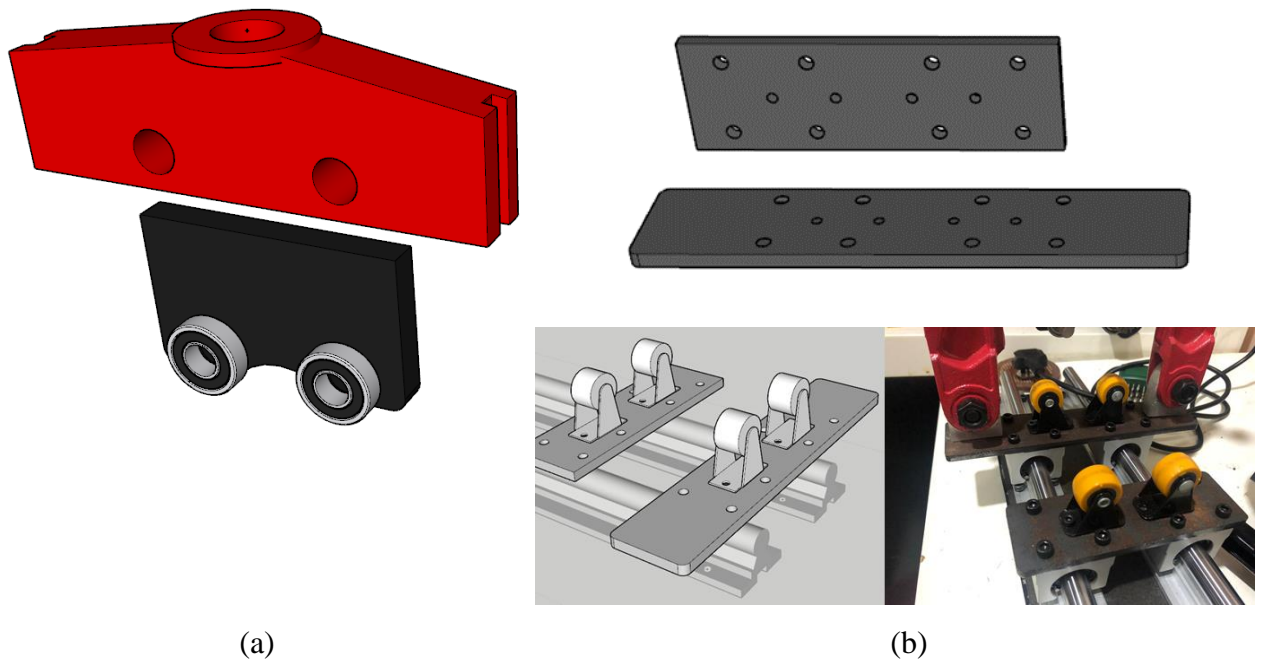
(a) Upper bearing support and (b) Roller based.
